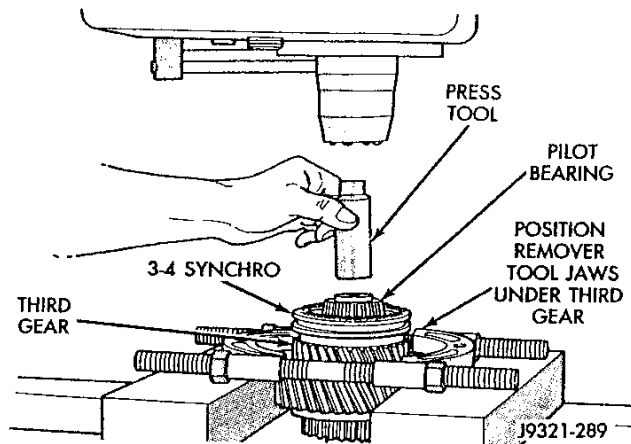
Pilot Bearing, 3-4 Synchro And Third Gear Removal
